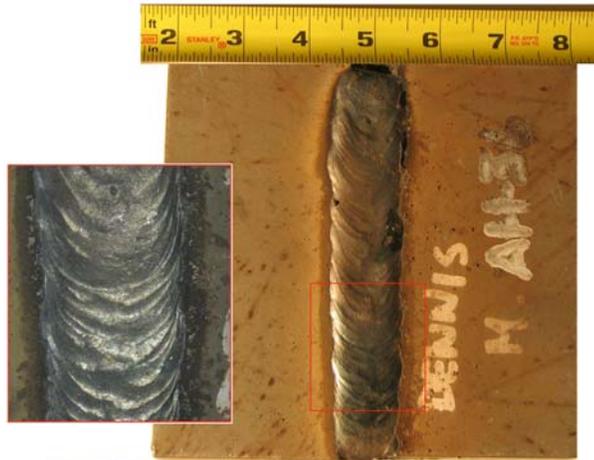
Front weld bead and weld pool segment (inset) of AH-36 welded specimen.
